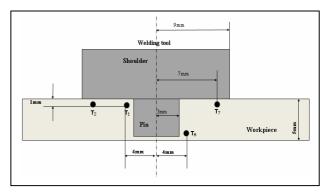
Thermocouples position at tool penetration on workpiece at section A-A.
